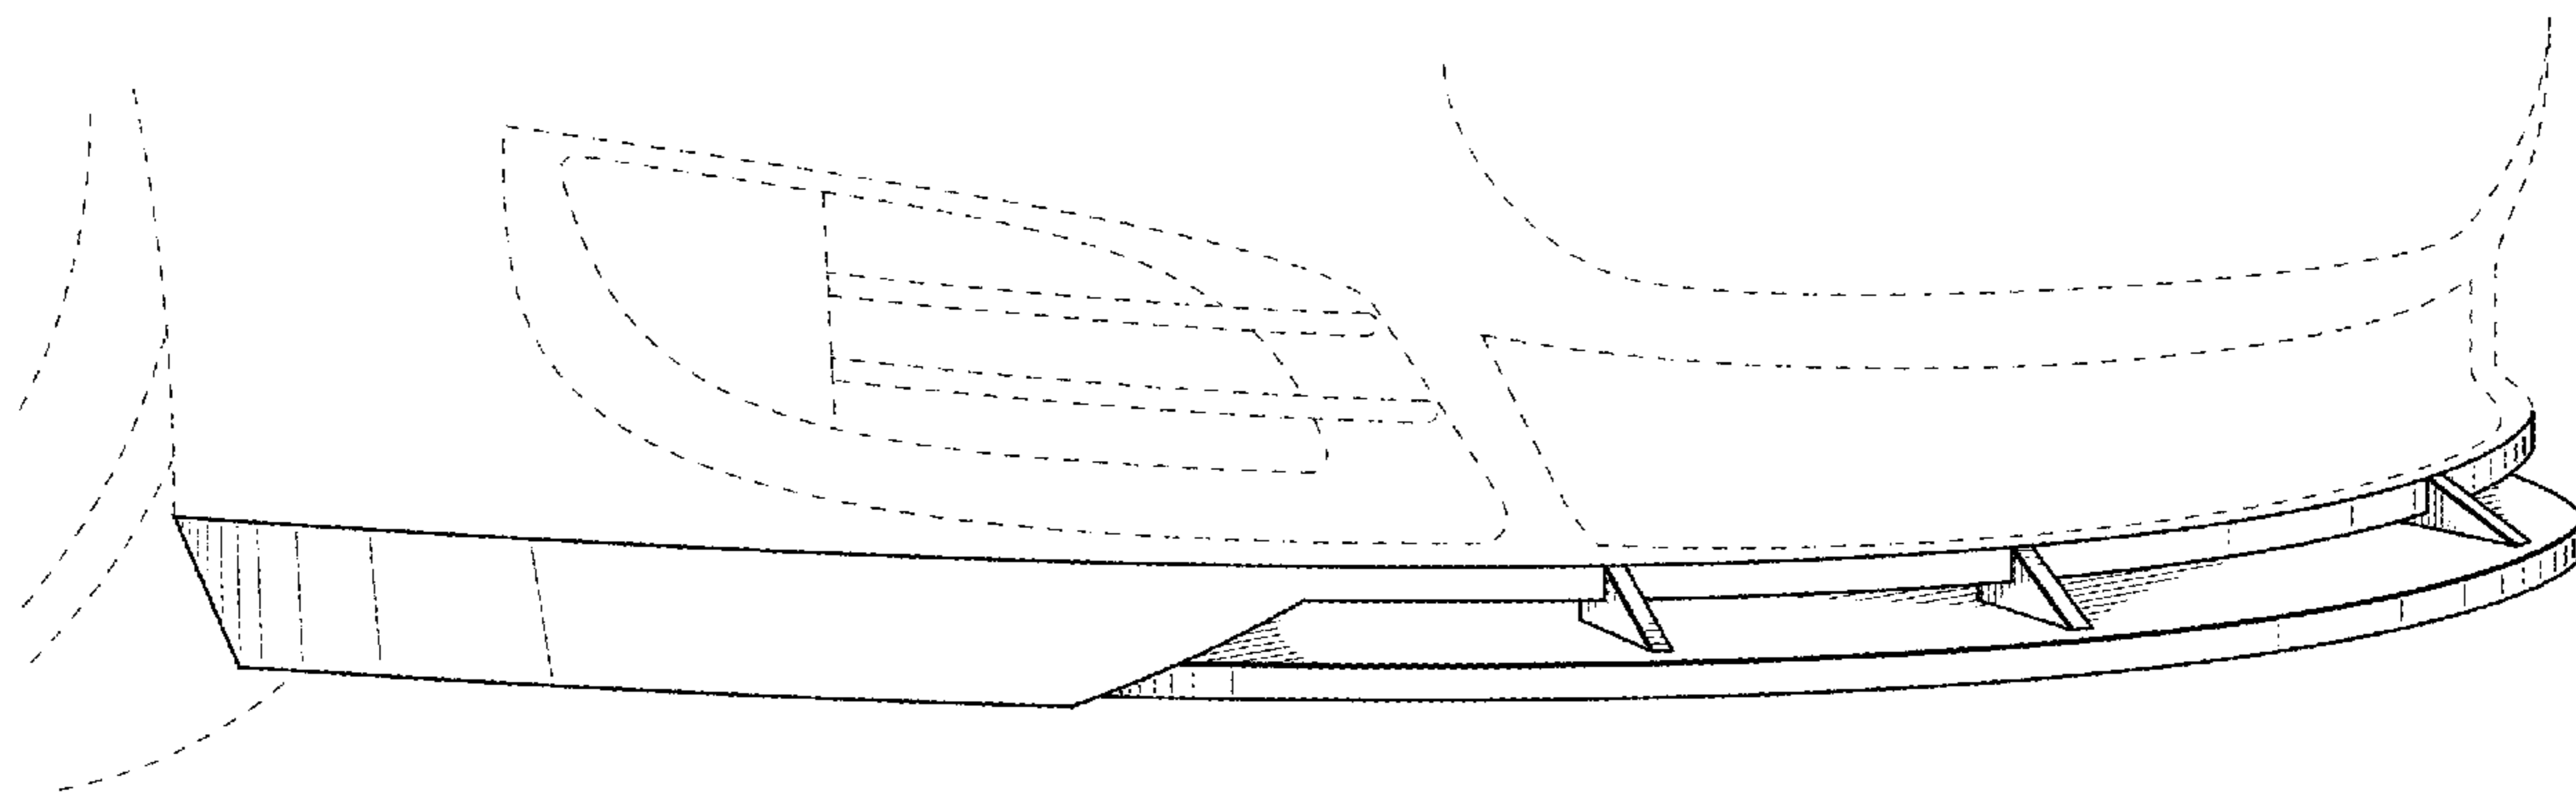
is a left, side elevation view thereof enlarged for ease of illustration, the right side elevation view being a mirror image;
